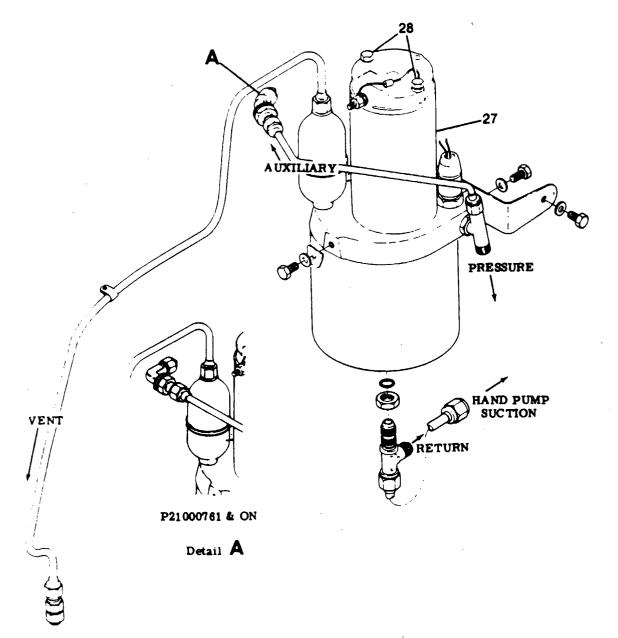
A-3. Hydraulic Power Pack Assembly (Sheet 2 of 2)
